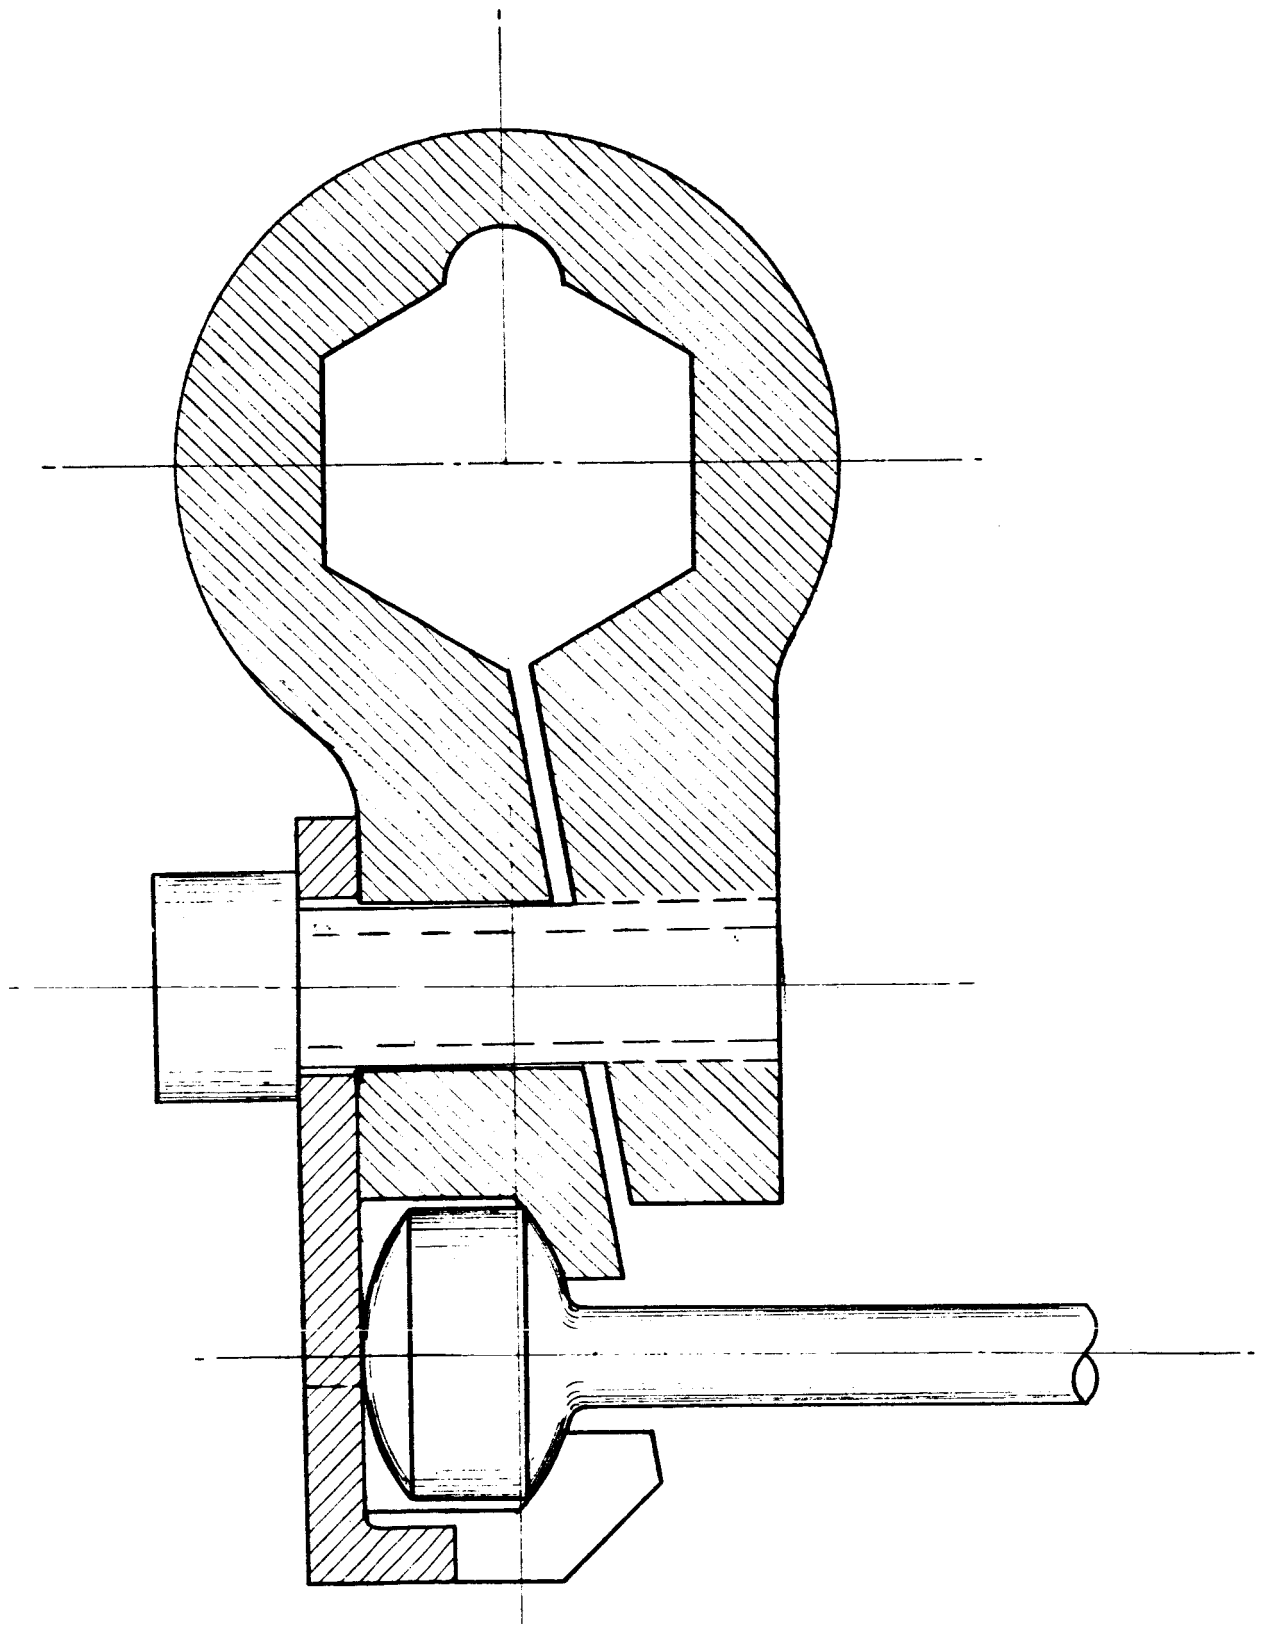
Redesigned O₂ Injector Rocker Arm
